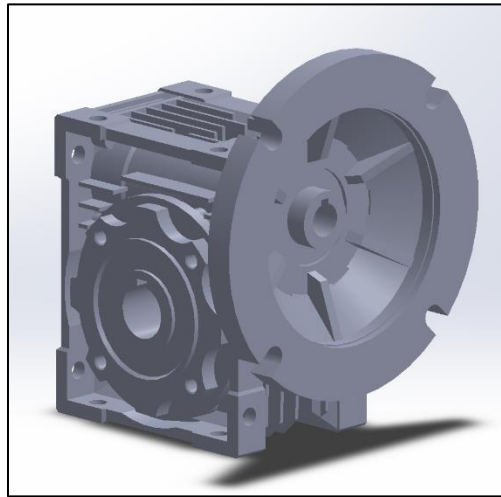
WGA-50M-060-H1 60:1 Gearbox
